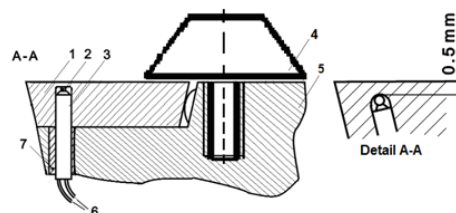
Prepared cutting insert with thermocouple installed in the body of the milling head
